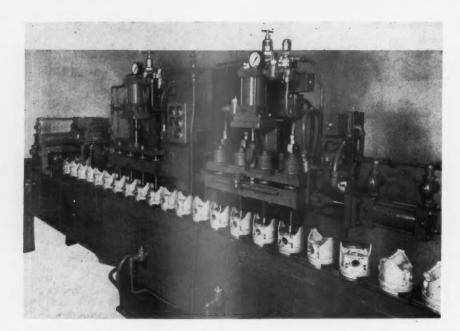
Automatic bearingizing machine for sizing gudgeon pin holes to within 0.0002 in and imparting a good surface finish
